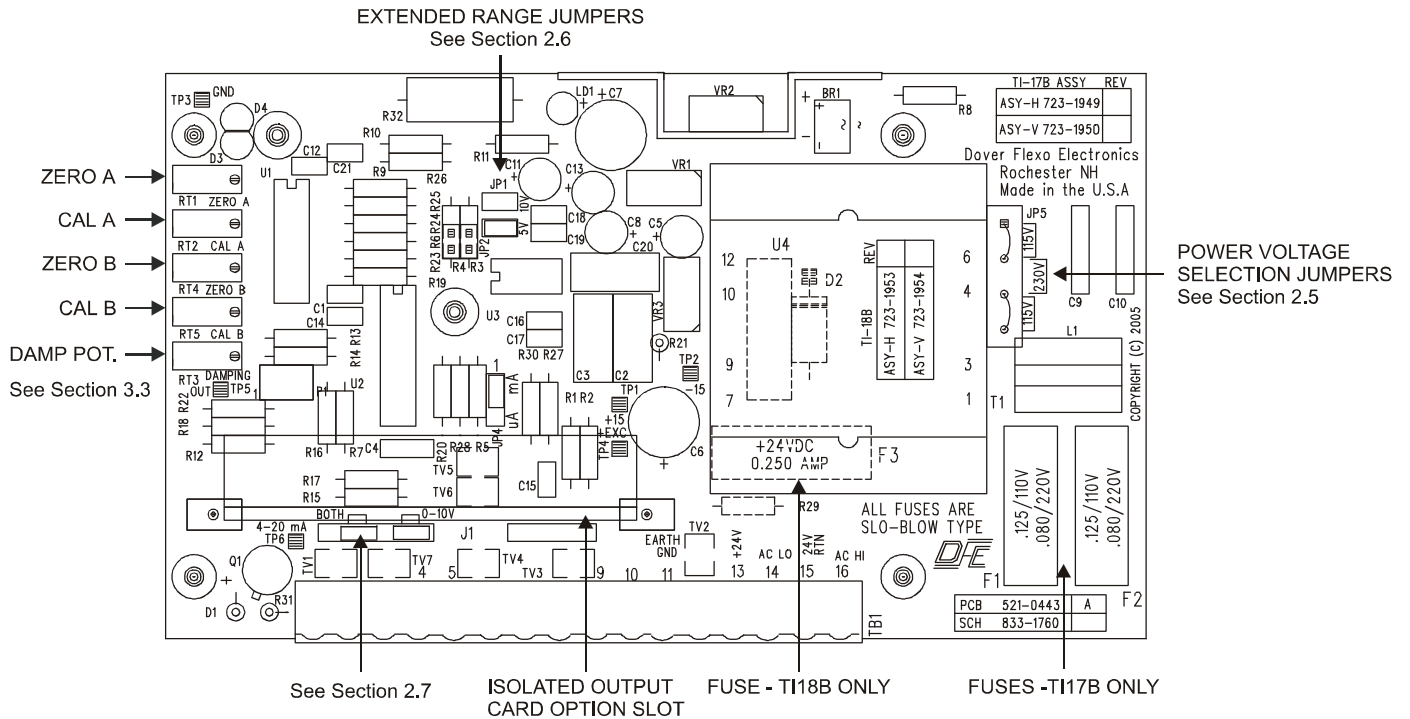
TI17B and/or TI18B PC BOARD (Enlarged for clarity)
